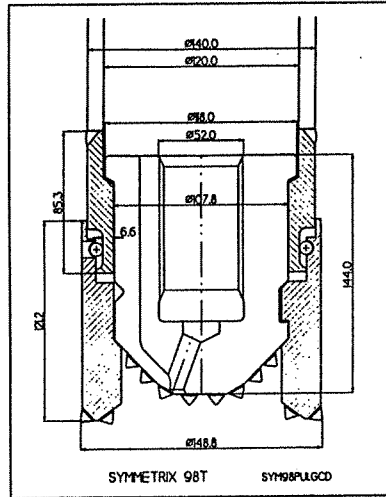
Drill bit for installation of drilled piles in underpinning of existing foundations.
